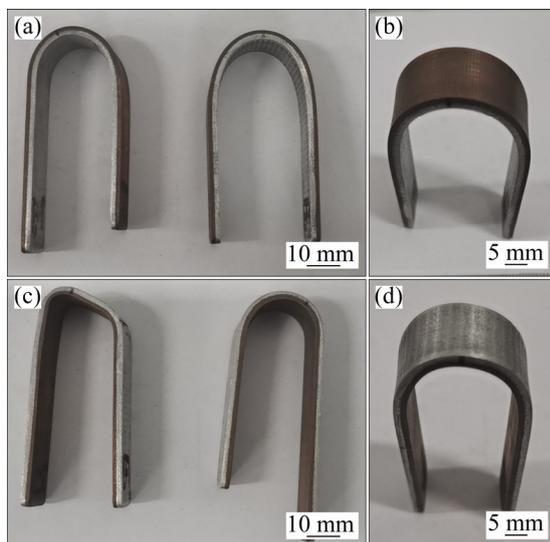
Bending samples of M-FSP plate with overlap of 2/24: (a) Side view of T2 copper in tensile force; (b) Tensile face of T2 copper; (c) Side view of AA5083 in tensile force; (d) Tensile face of AA5083
